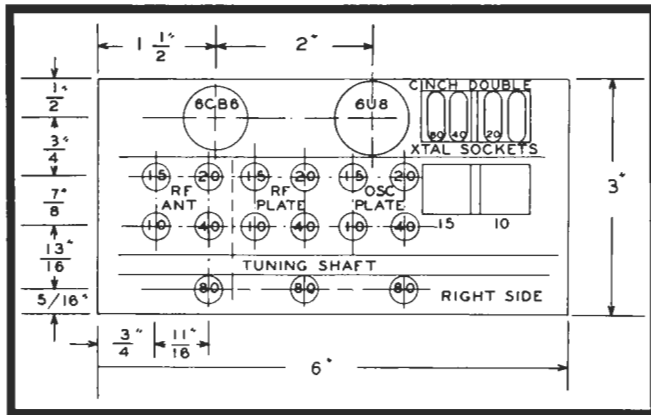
LAYOUT DIAGRAM for the converter subchassis on which the tube sockets, coils and crystal sockets are mounted. Holes not marked for location and size should be drilled to suit the components used. The subchassis has a $\frac{1}{2}$ -inch step between the coils and tube sockets.
